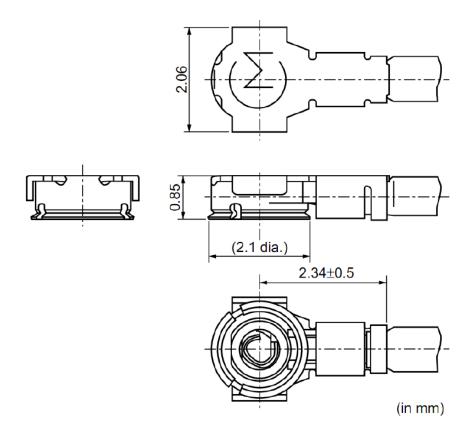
Specifications of Mating Plugs Using Ø0.81mm Coaxial Cables
